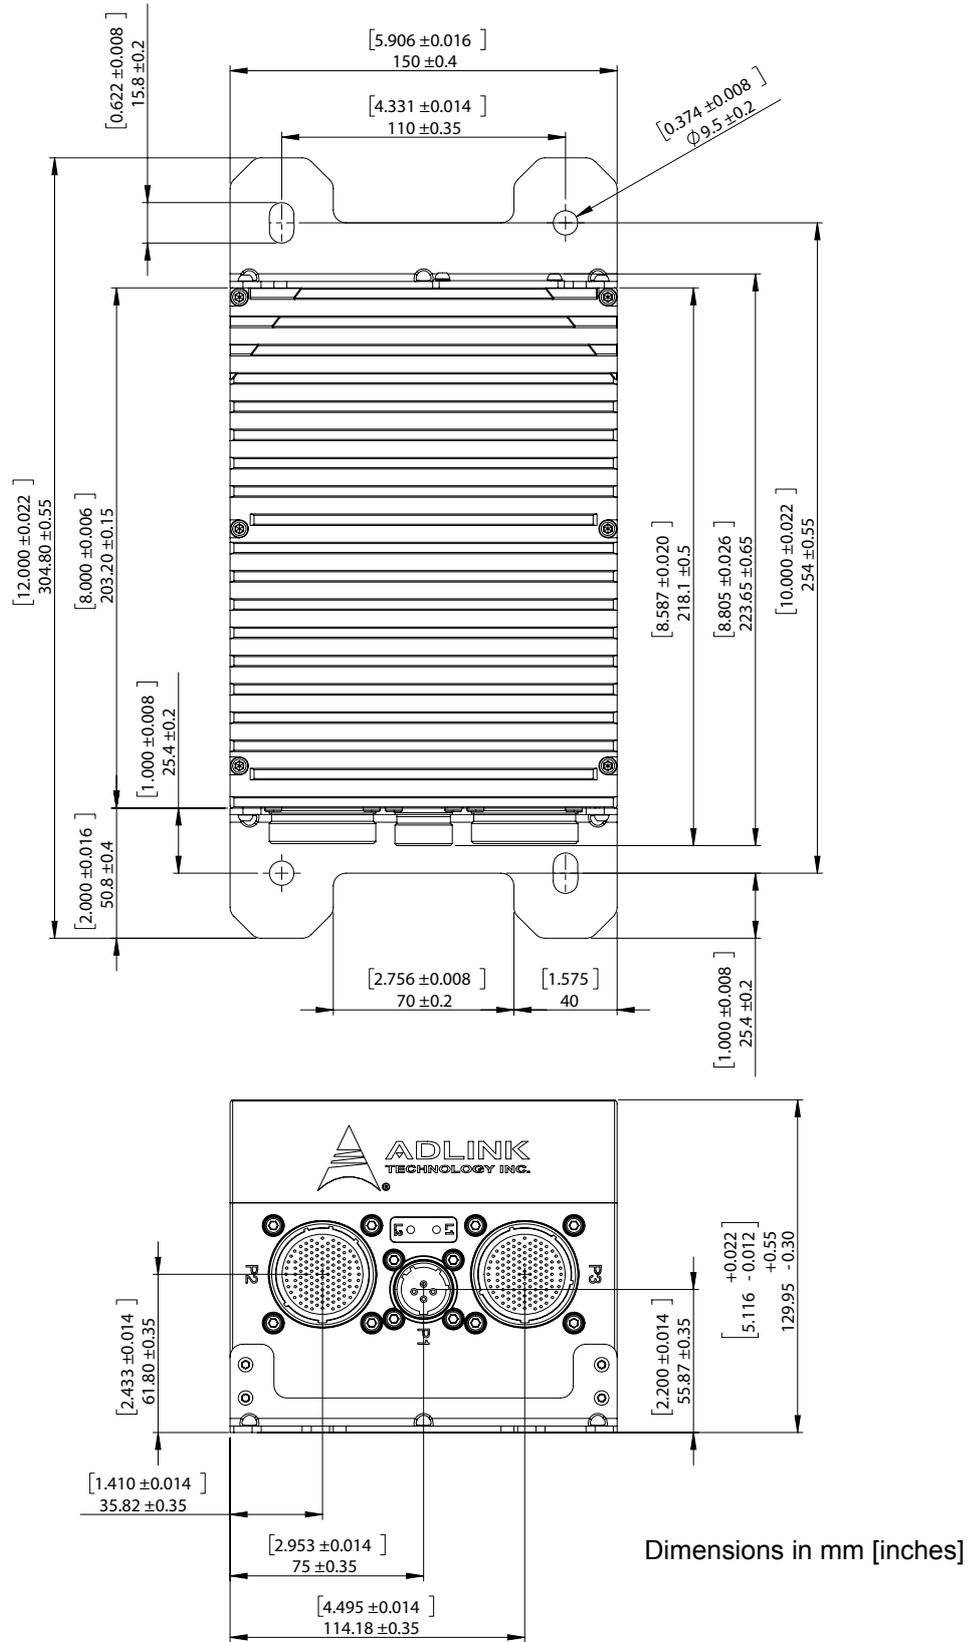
Top and Front Views of “MH” Enclosure with Mounting Dimensions
